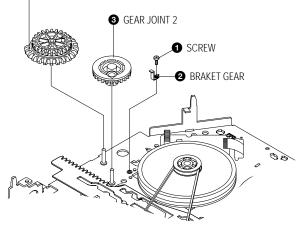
Bracket Gear, Gear Joint 1,2 Removal
